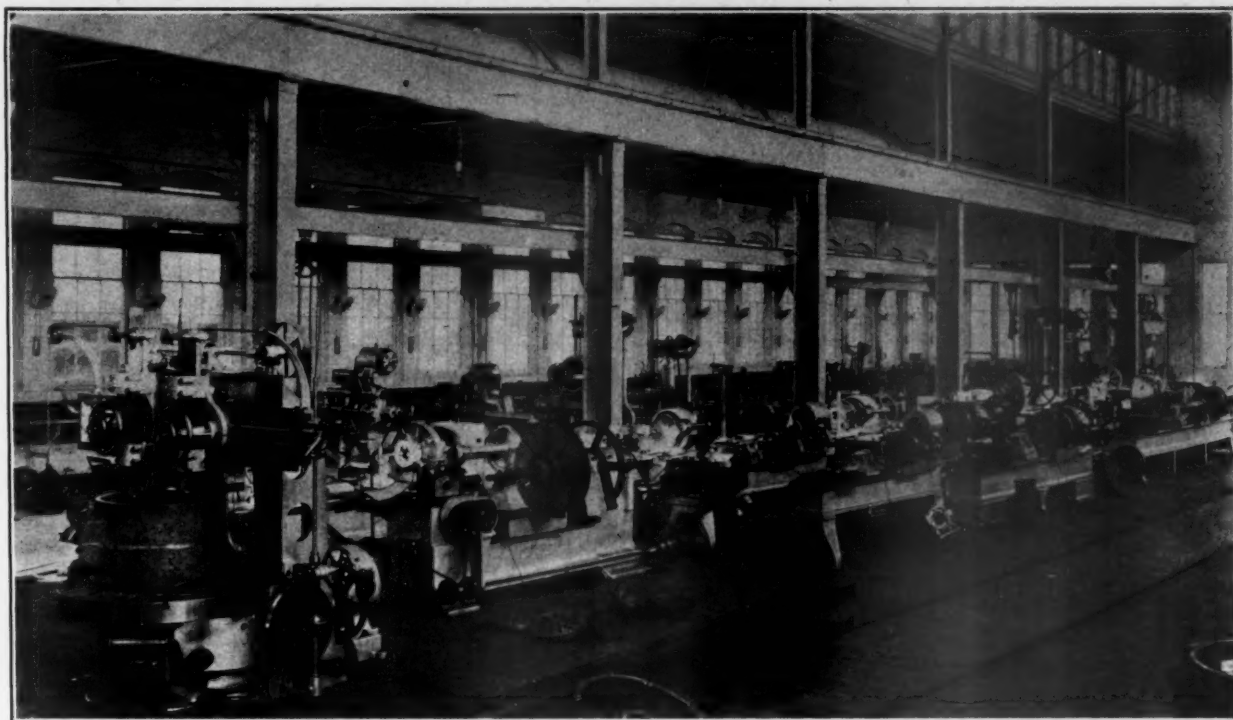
A MODEL MOTOR-DRIVEN MACHINE SHOP.—WORKS OF THE BULLOCK ELECTRIC MANUFACTURING COMPANY.
